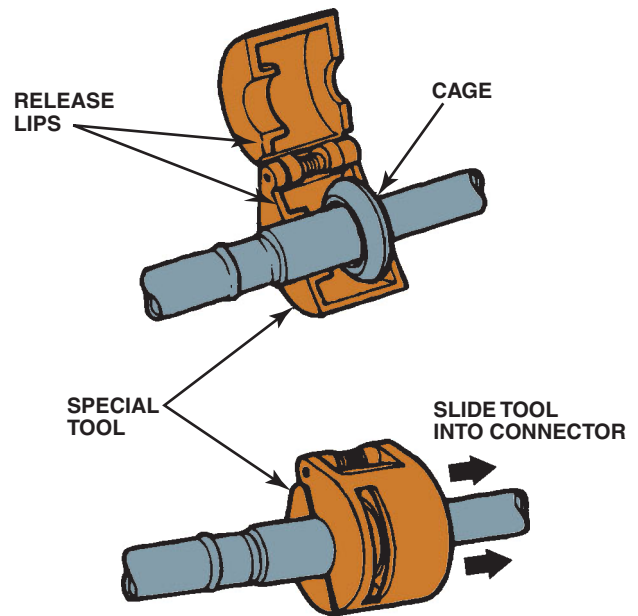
Ford spring-lock connectors require a special tool for disassembly.
